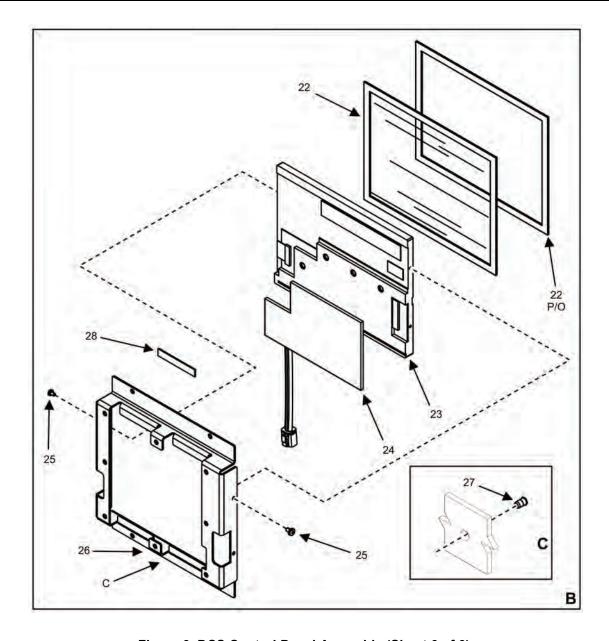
DCS Control Panel Assembly (Sheet 6 of 6).
